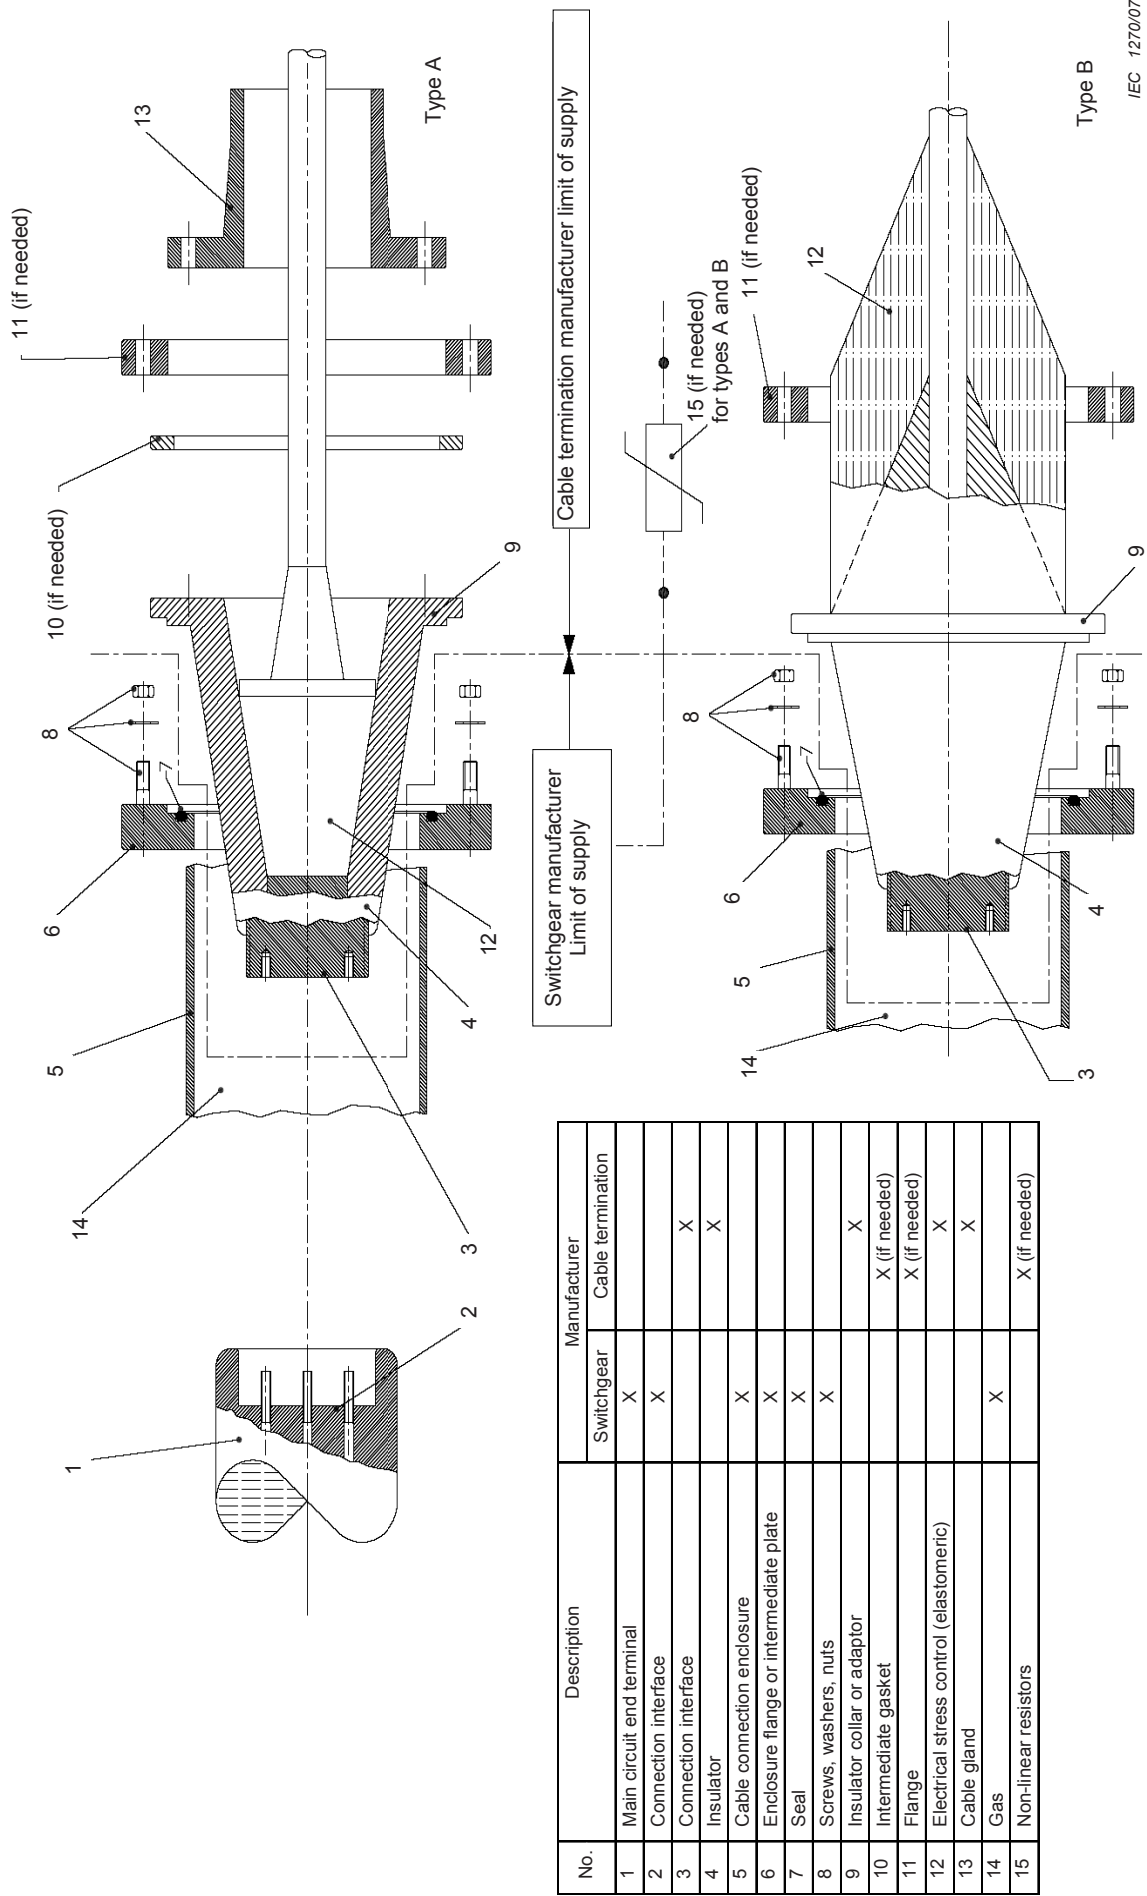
Fluid-filled cable connection assembly – Typical arrangement
